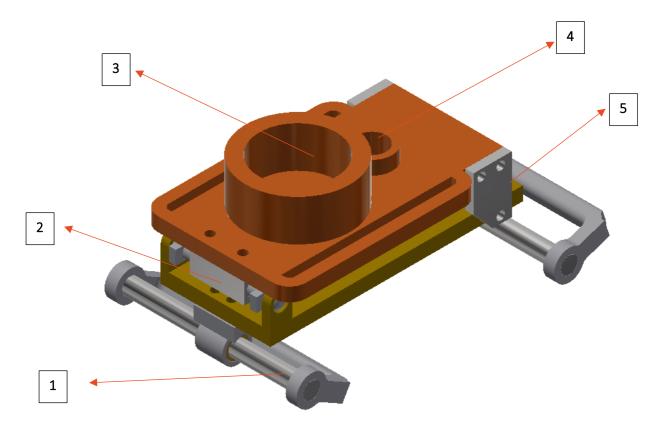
3D CAD MODEL FOR MANUAL PLACEMENT OF TRANSDUCER ON THE WRIST
